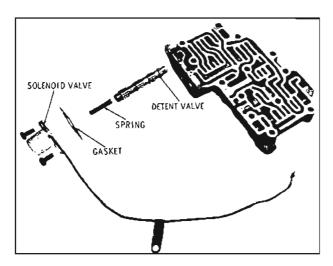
Installing Detent Valve and Detent Solenoid valve body over and retaining pin will fall free. Remove plug, spring and valve from body. (Fig. 6-315)
